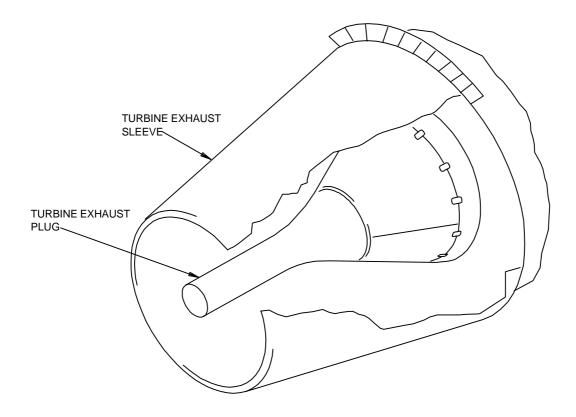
78-00 Exhaust Component Index Fig. 101 (Sheet 5)
